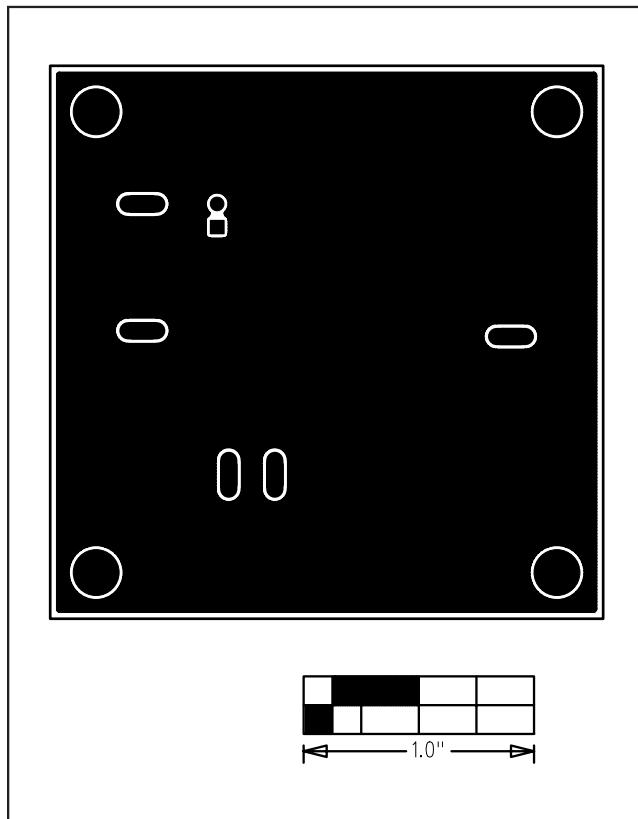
MAX8526 EV Kit PCB Layout—Solder Side
